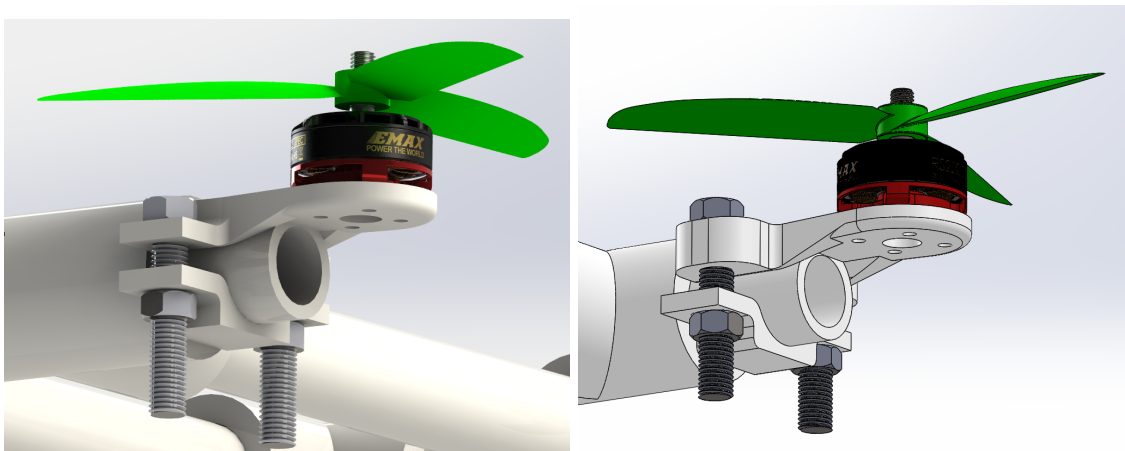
Motor Mount CAD Version 1 (left) and Version 2 (right)
